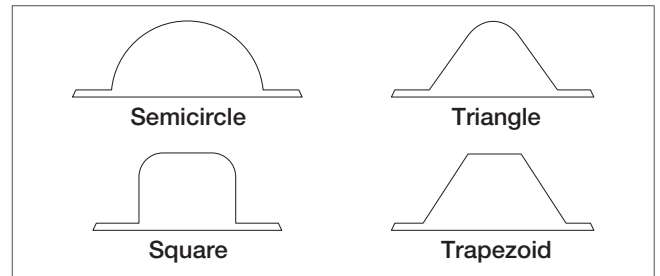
Cross-sectional Shape of Gasket (Height: 1mm)
